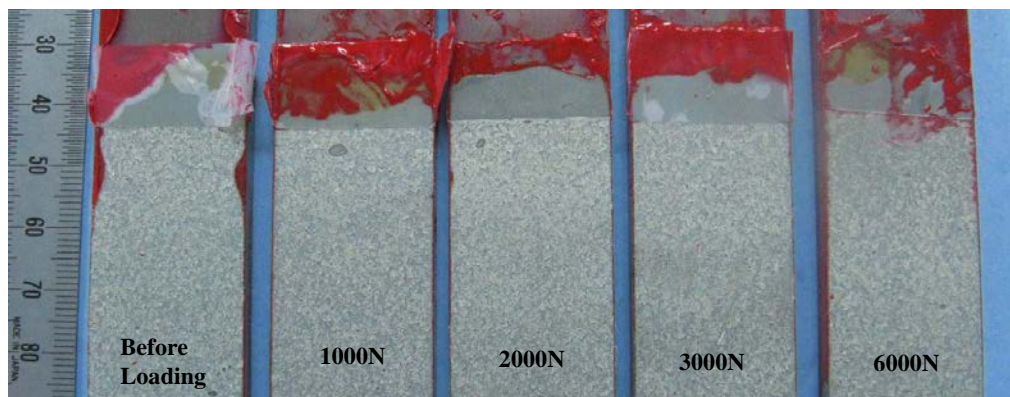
Observation of crack progress on NS770 bonded ENF joint (ink penetration)
